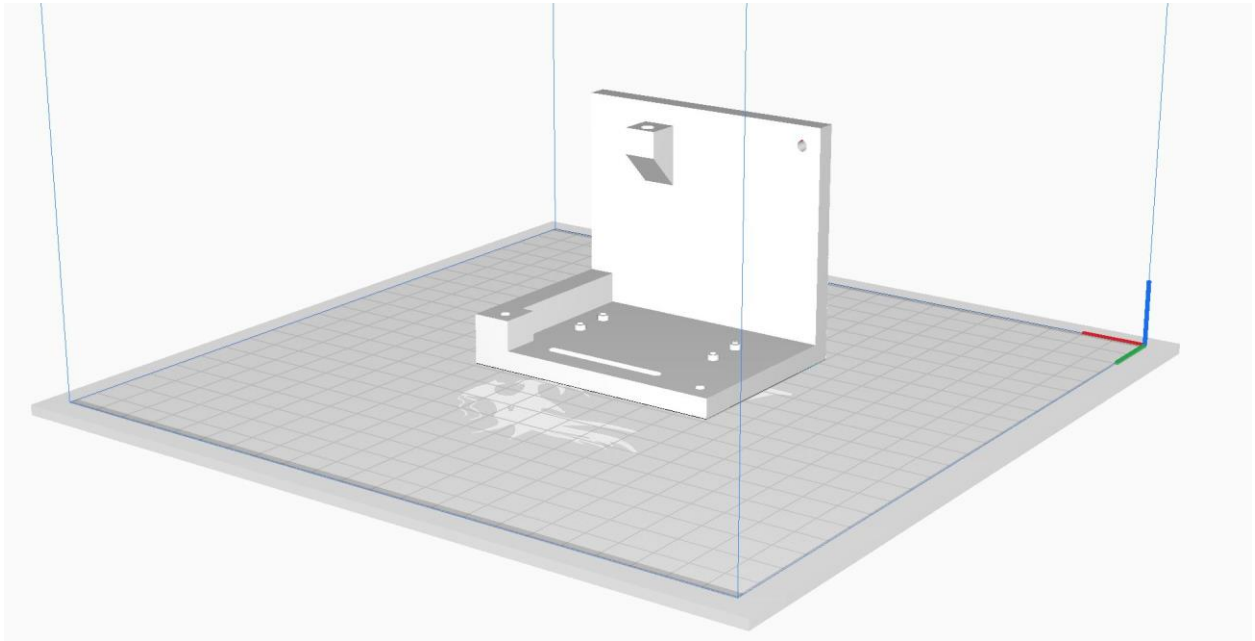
Print orientation for the bottom (and side) piece of the Wheels module enclosure. Note the direction of the teardrop shape for the hole in the top right corner, as well as how the chamfer plays a supporting role for another hole.
